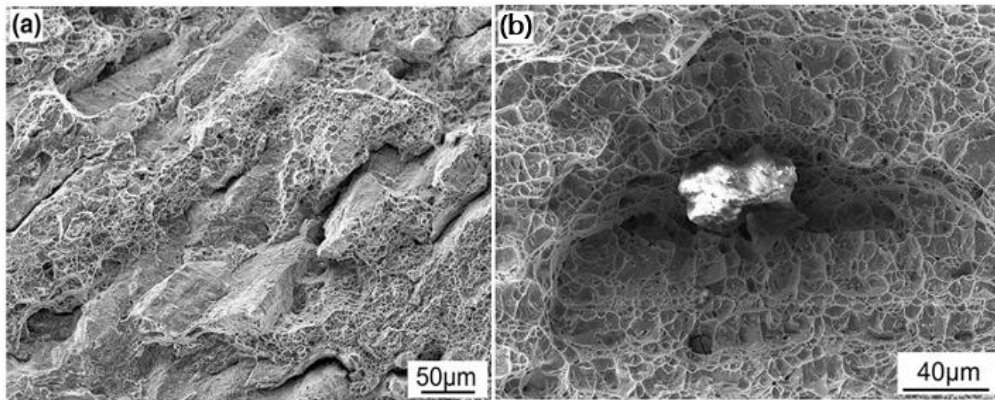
Typical defects on the fracture surface of the as-deposited maraging steel: a) Crack; b) Oxide Inclusions [27]
